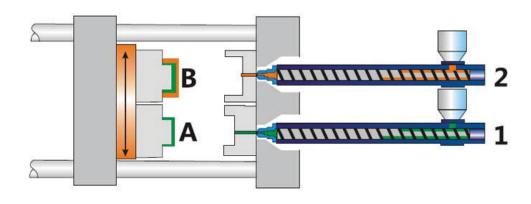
Schematic overview of the principle of 2K injection molding (VDL, n.d.)
